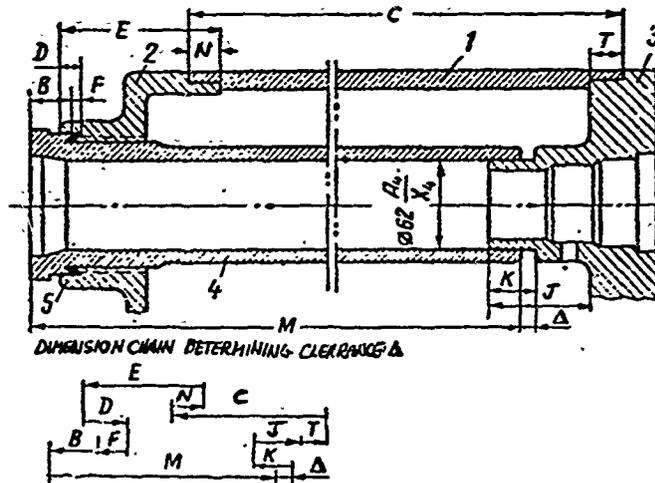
Assembly Schematic of Recoil Mechanism Internal Cylinder
